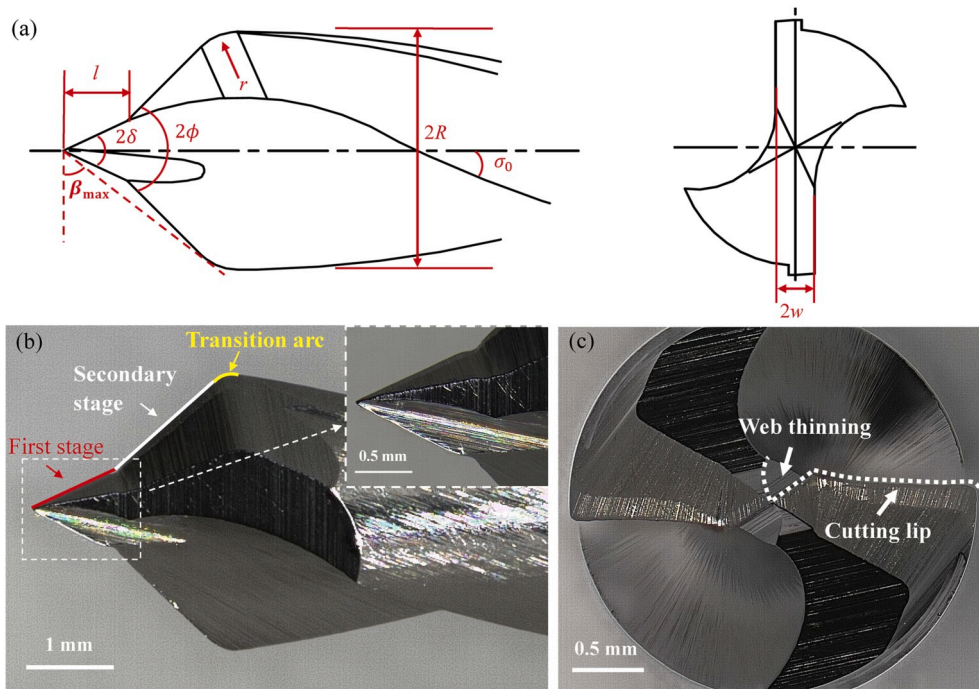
Geometry design (a) and prototype of the proposed drill bit from the side (b) and bottom (c) views.
